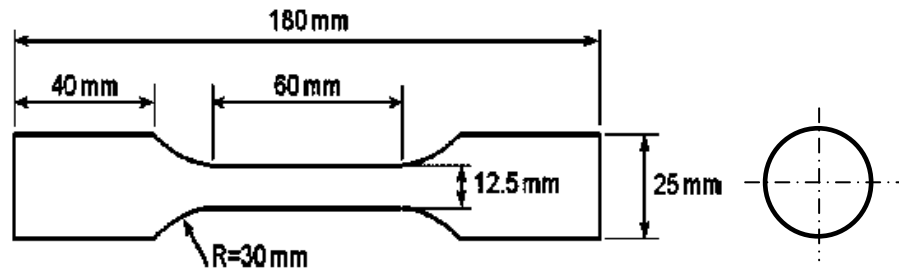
Schematic drawing, to make tensile specimens according to the standard ASTM E8-82
